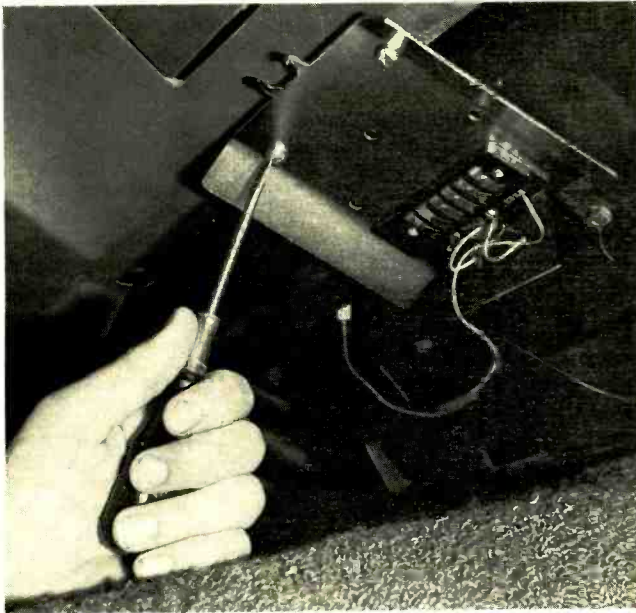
STATIONARY SECTION of slide mount is secured under the dash using sheet metal or machine screws.
